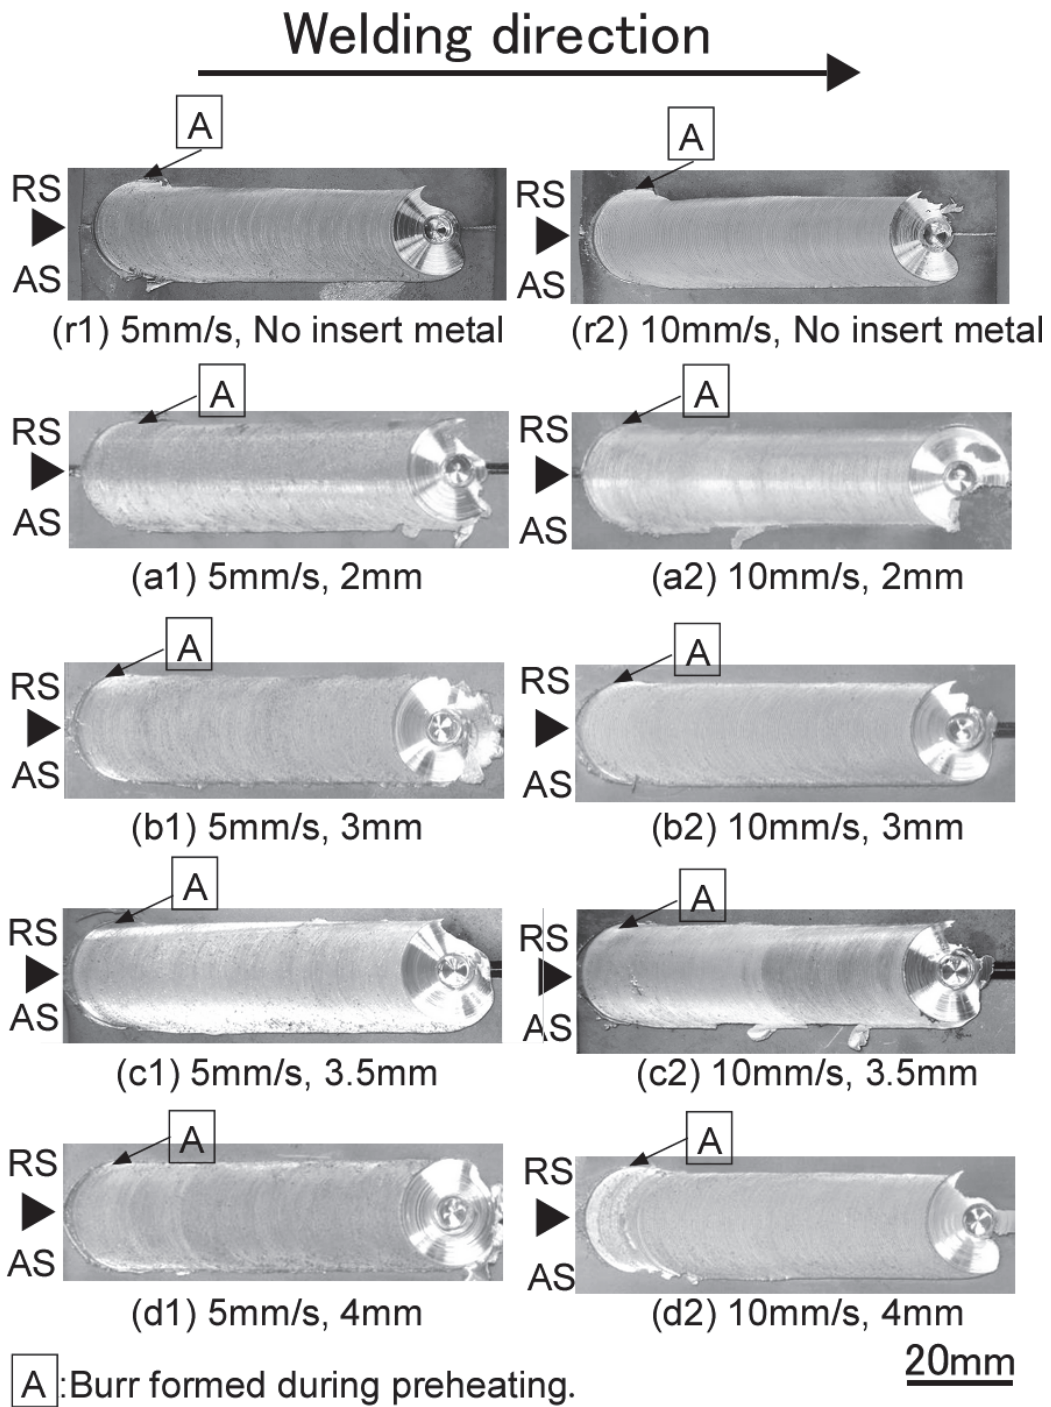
Appearances of FSW joints welded under various conditions. (Without offset. $d=0$) The black triangles indicate the positions of the welding interfaces.
